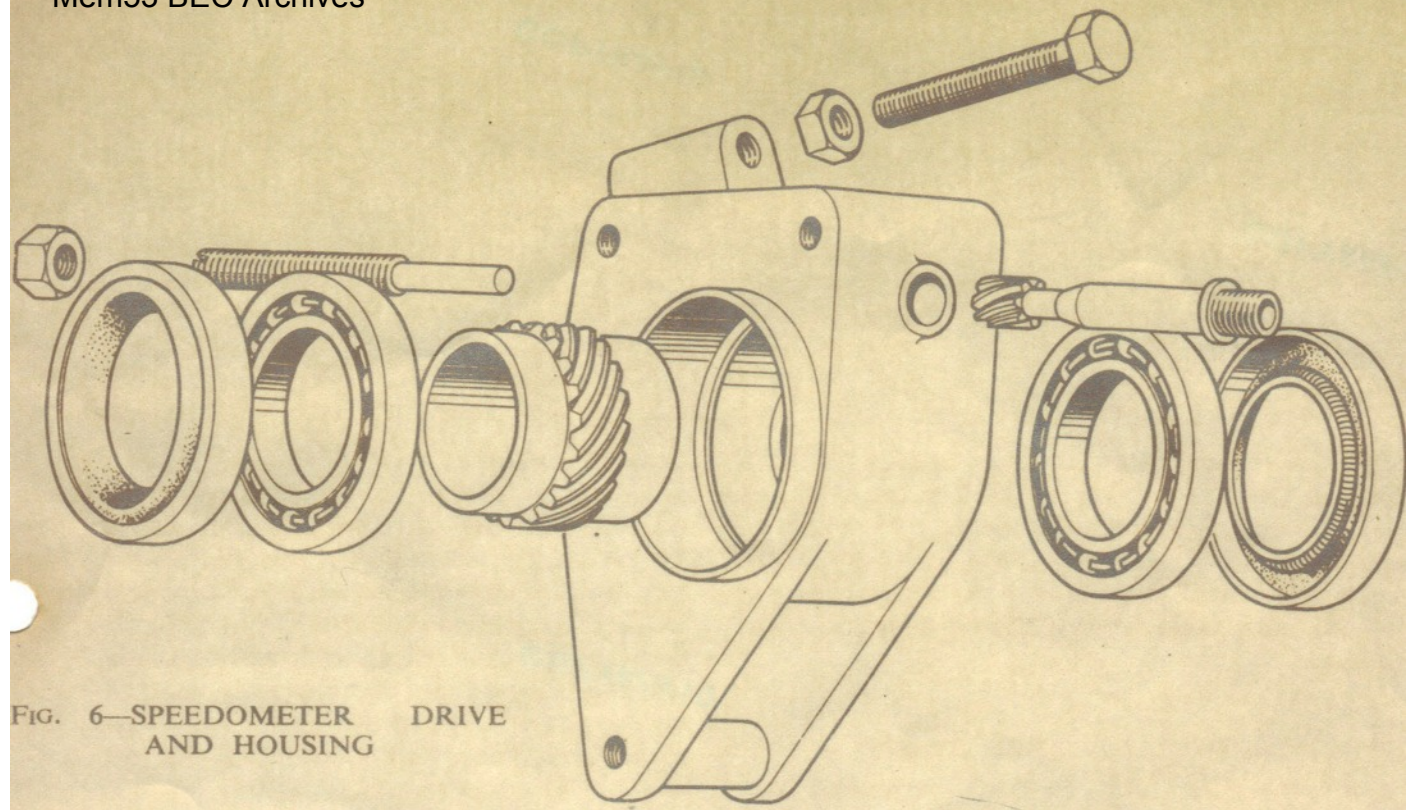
SPEEDOMETER DRIVE AND HOUSING
